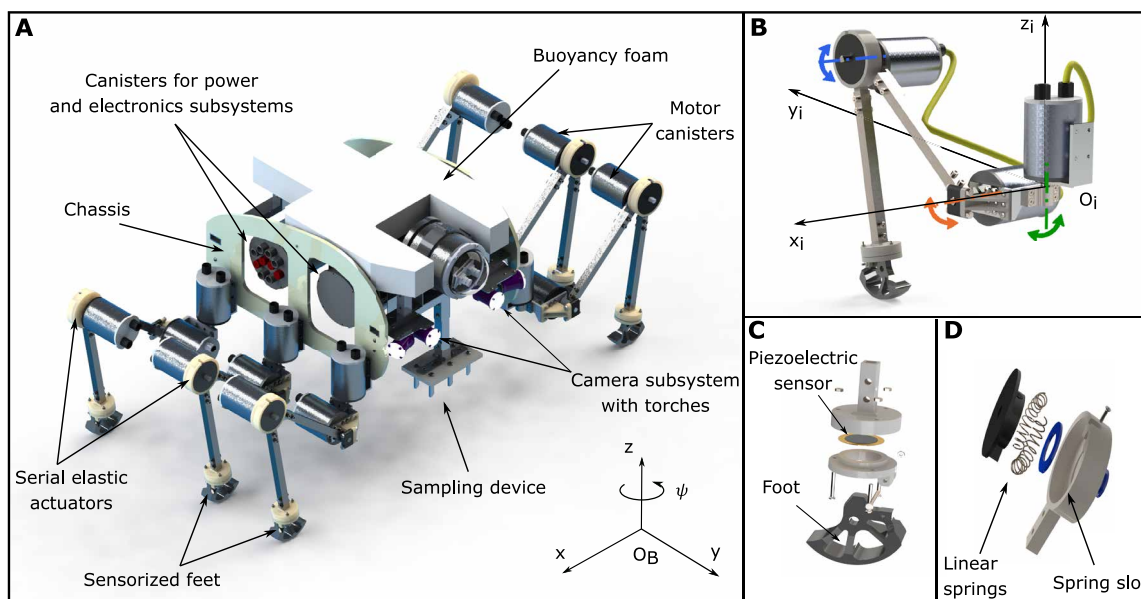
CAD drawings of SILVER2. (A) A CAD drawing of SILVER2 highlighting all main components and the body frame. The center of the body frame O_B is in the geometric center of the robot. The body of the robot is about 35 cm by 60 cm by 70 cm and weighs 22 kg including legs. (B) Segmented leg of SILVER2 with three DOFs, namely, coxa (green), femur (red), and tibia (blue) joints. Legs' length from coxa joint to foot tip is about 60 cm. The leg frame of leg i is centered in O_i located on the vertical axis defined by the coxa joints, at the same height of the femur joint axis. The coxa joint allows rotations of the whole leg around the z axis. The femur and tibia joints define the leg position in the vertical plane set by the coxa angle. (C) The distal part of the leg is hinged to an aluminum foot that presses on a piezoelectric sensor to sense touchdown and takeoff with the ground. (D) The tibia joint is equipped with a SEA implemented with two linear springs ($k = 10$ kN/m), which enables the hopping locomotion.
